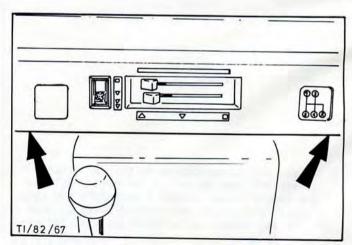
Mount bezel on facia panel - retaining screws arrowed.
